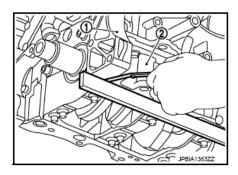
Checking Surface Height Difference Between Rear Timing Chain Case And Oil Pan (Upper) Mounting Surface Using Tool Courtesy of NISSAN NORTH AMERICA, INC.
